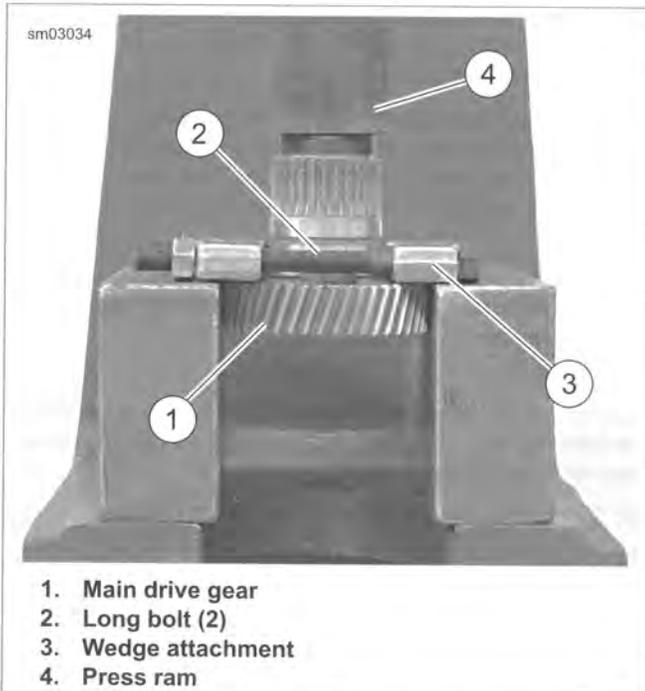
Removing Inner Bearing Race From Main Drive Gear
